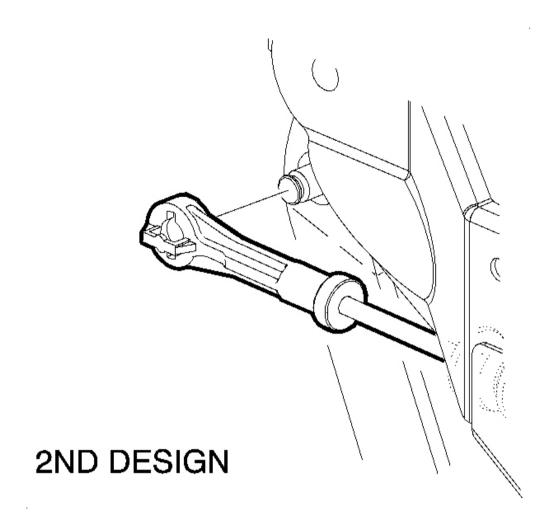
Clutch Position Switch & Clutch Pedal Courtesy of GENERAL MOTORS CORP.
